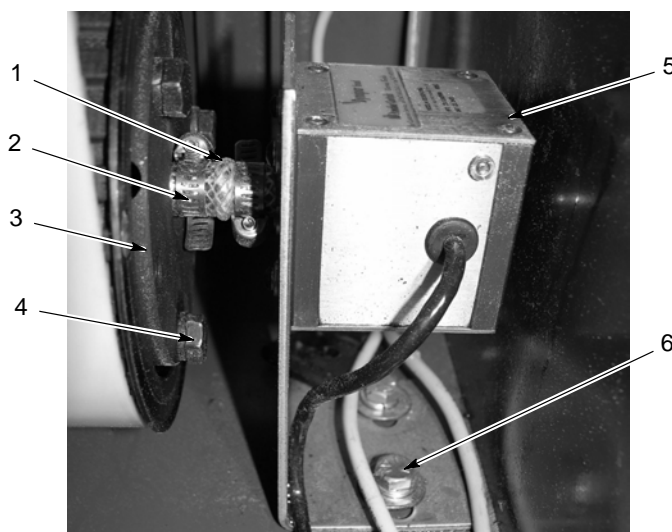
Gearmotor Replacement - Encoder and Pulley Removal
